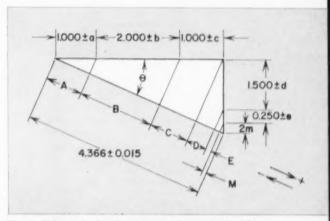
Schematic sketch analyzing dimensional problems of bracket assembly shown in Fig. 4. Tolerances a, b, c, d, e, and m to be determined to give a 0.015 inch tolerance for center distance of holes.
